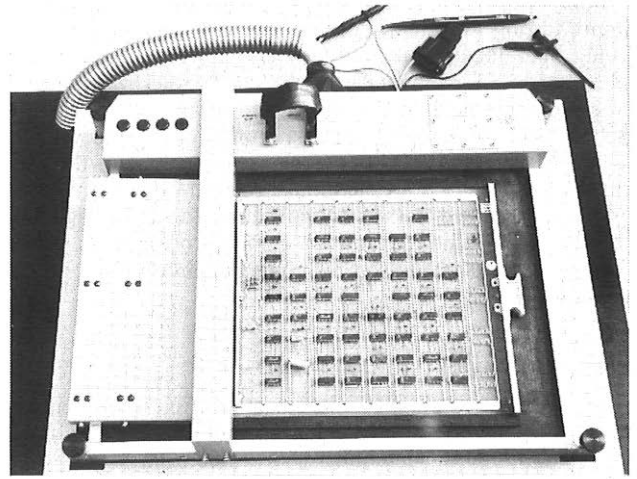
A vacuum operated bed-of-nails jig showing a slide-in-unit in position
